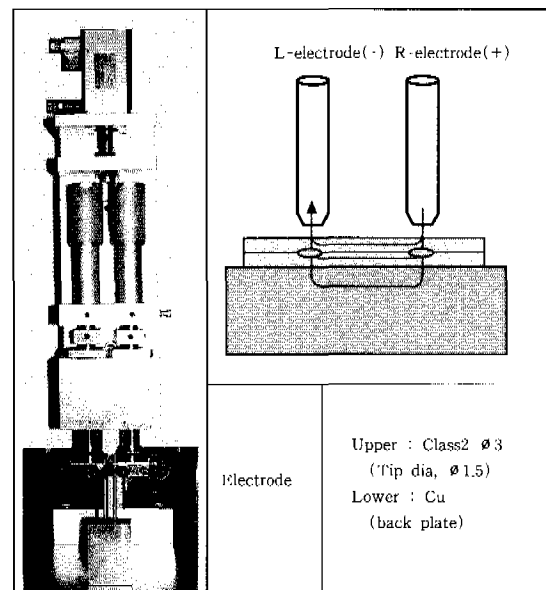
Appearance of twin head and schematic diagram of electrode for series welding
